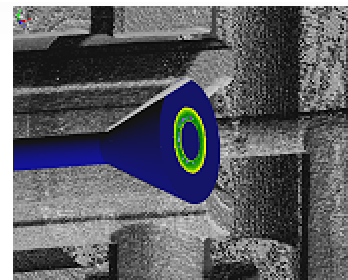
Virtual assembly of CAD and scanned data. The cylinder fits perfectly in the plastic housing.
